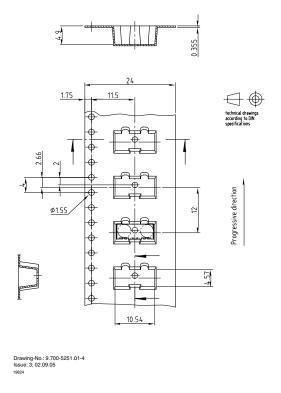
Tape for 4.0 - mm Package Top View Oriented
